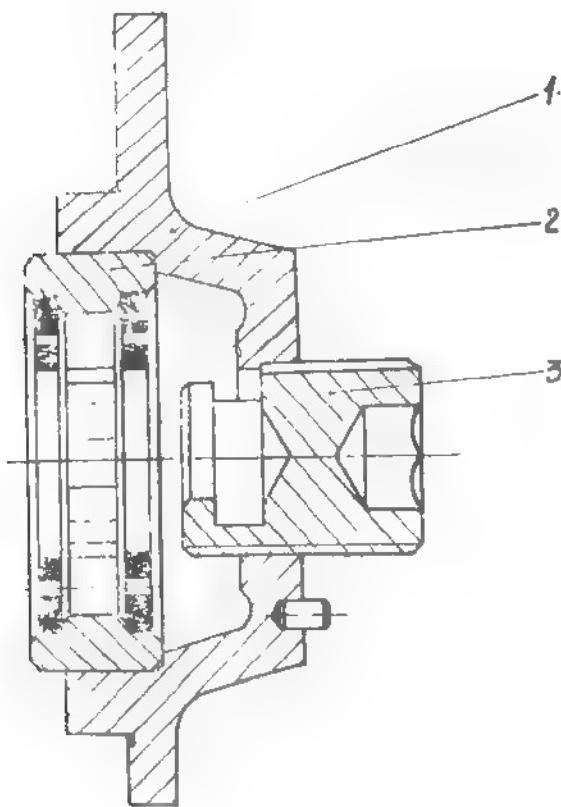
STEERING GEAR BOX COVER WITH BEARING
